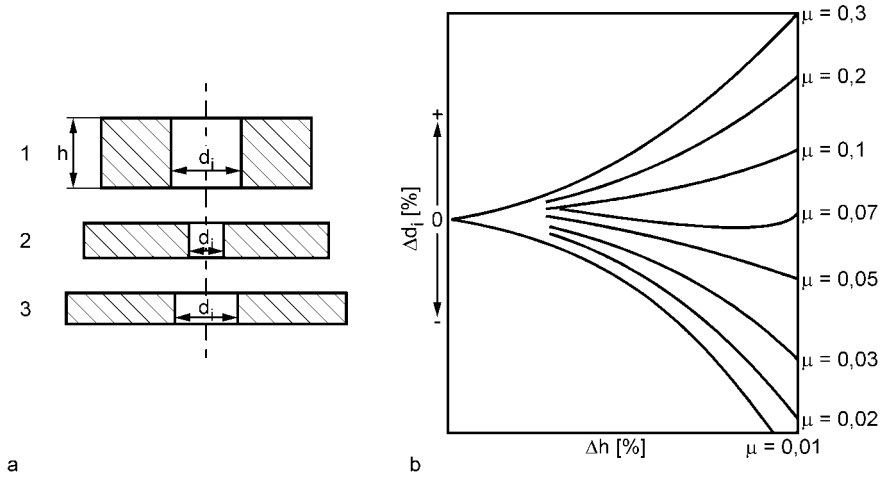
Ring upsetting test to determine coefficient of friction for solid metal forming. (a) geometrical changes of a ring through upsetting: 1, blank; 2, upset blank with large μ ; 3, upset ring with small μ ;
